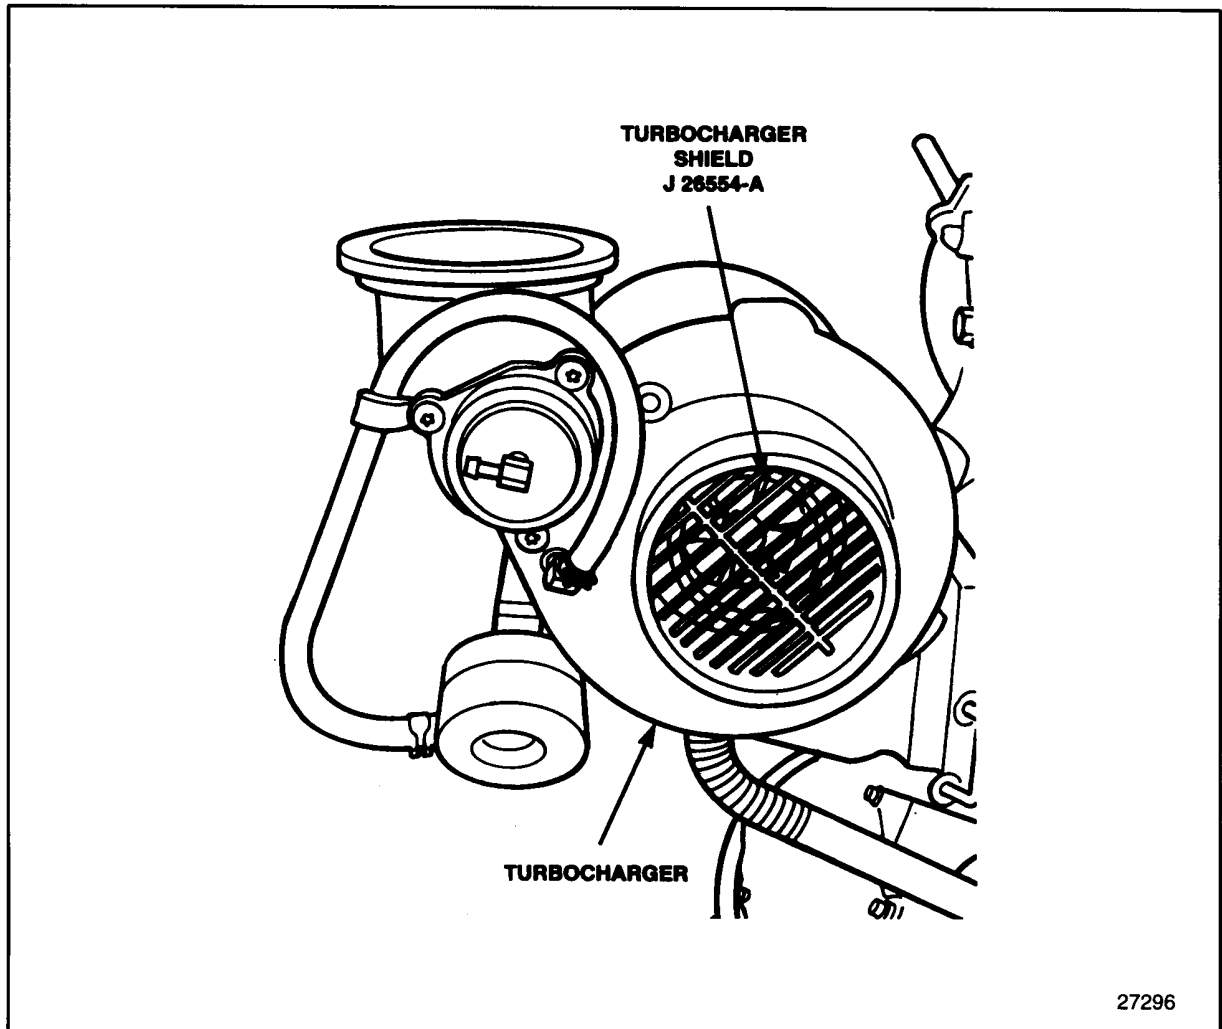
Turbocharger Compressor Inlet Shield (Series 50G)
